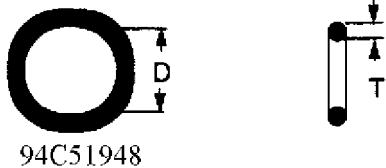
O-Ring Illustration For Diameter & Thickness Measurement
